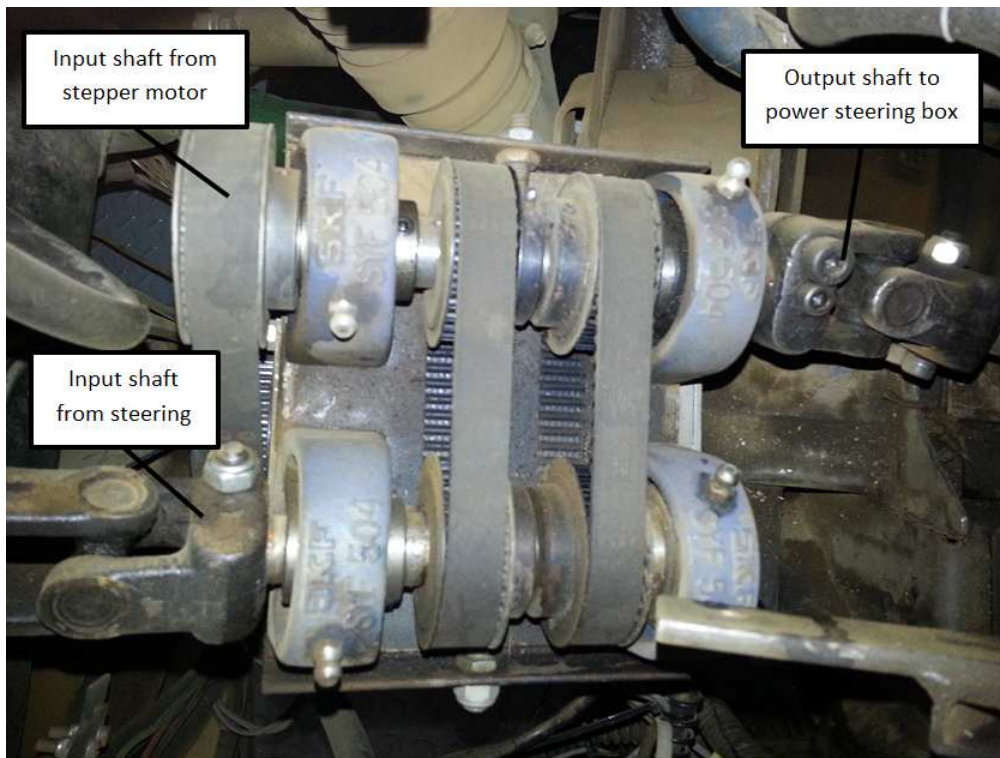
Top view of the stepper motor assembly installed in the engine bay
